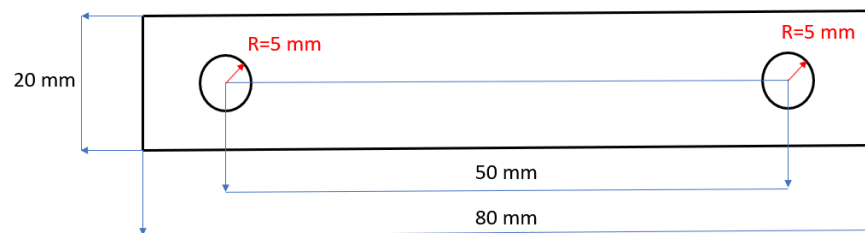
Geometry of the U-bend samples machined from AA7075-F sheets.
